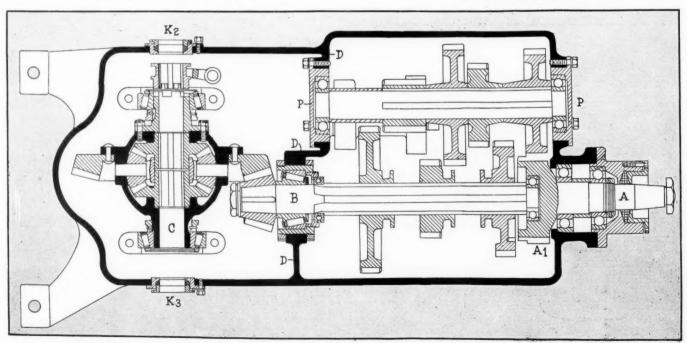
Sectional plan view of the Warner integral gearset and differential unit for 5-ton trucks. Note the partition D
